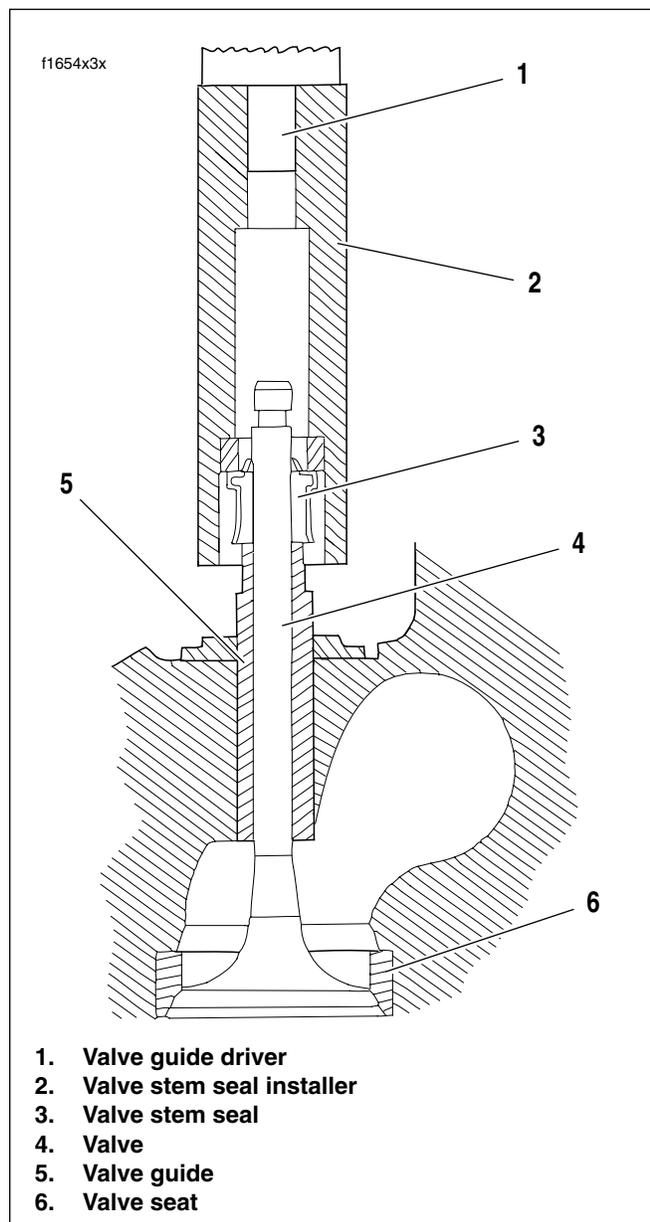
Tap Installer to Seat Valve Stem Seal
